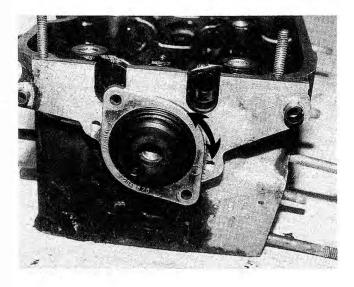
Camshaft oil seal housing being removed from cylinder head. Rotate housing back and forth as it is removed (arrow).
